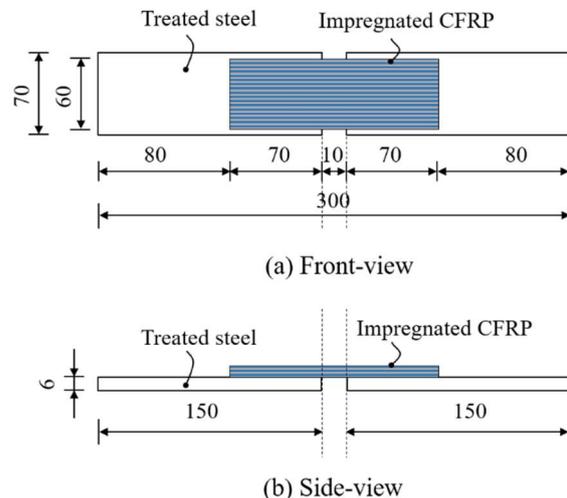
Geometry of CFRP-steel single strapped joint (unit: mm)
